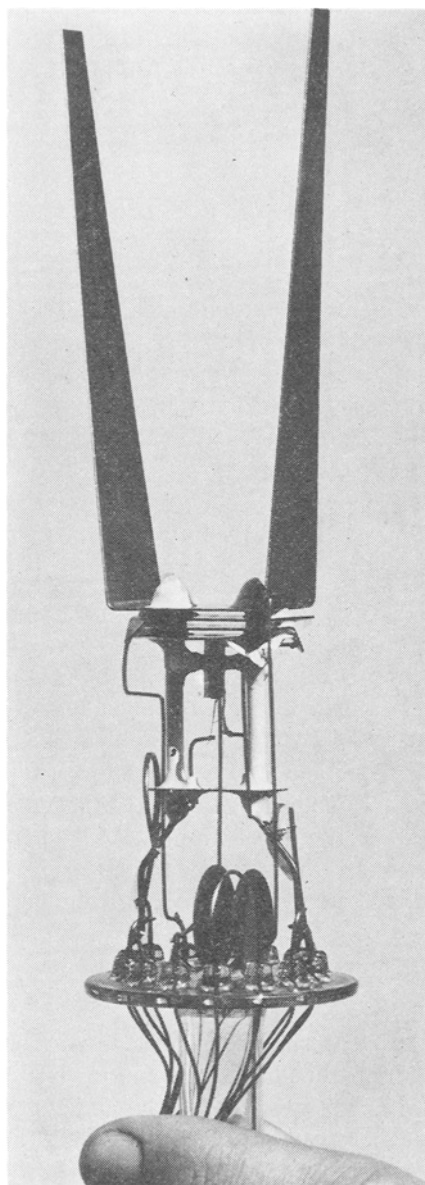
The electrodes and cathode of the gun are held rigidly in alignment by cementing the parts to ceramic supports while they are being held in proper position.
